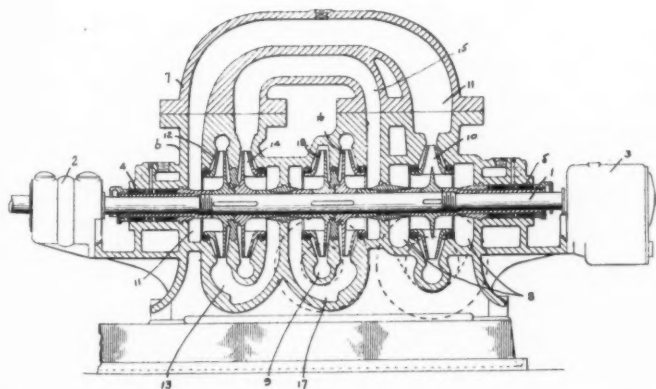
Multistage centrifugal pump designed for hydraulic balance of the impellers
